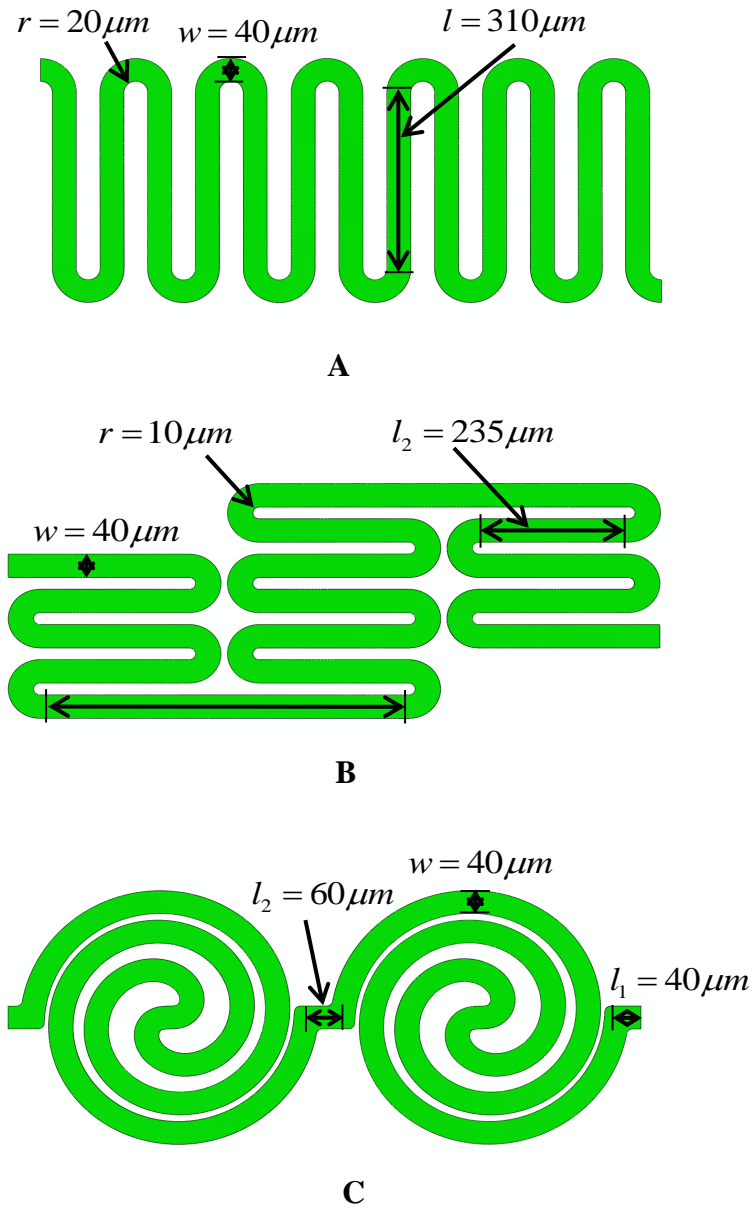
Geometry with dimensions for three interconnections⁴. (A) Geometry and dimension of serpentine pattern. (B) Geometry and dimension of fractal pattern. (C) Geometry and dimension of Archimedean spiral pattern.
